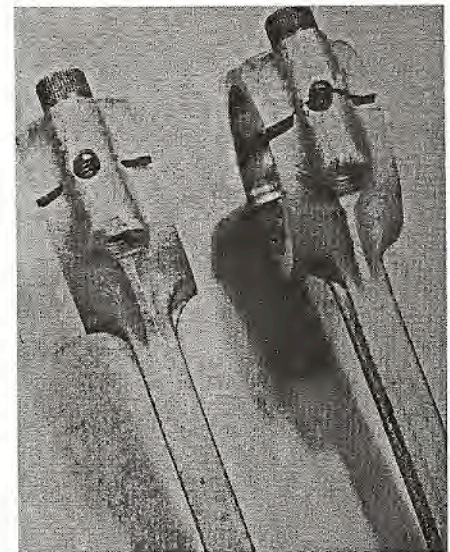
Assembled views of fractured connecting rod showing correct and incorrect cap installations.
